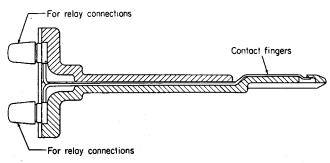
Sectional view of XLA13A test plug showing internal wiring
